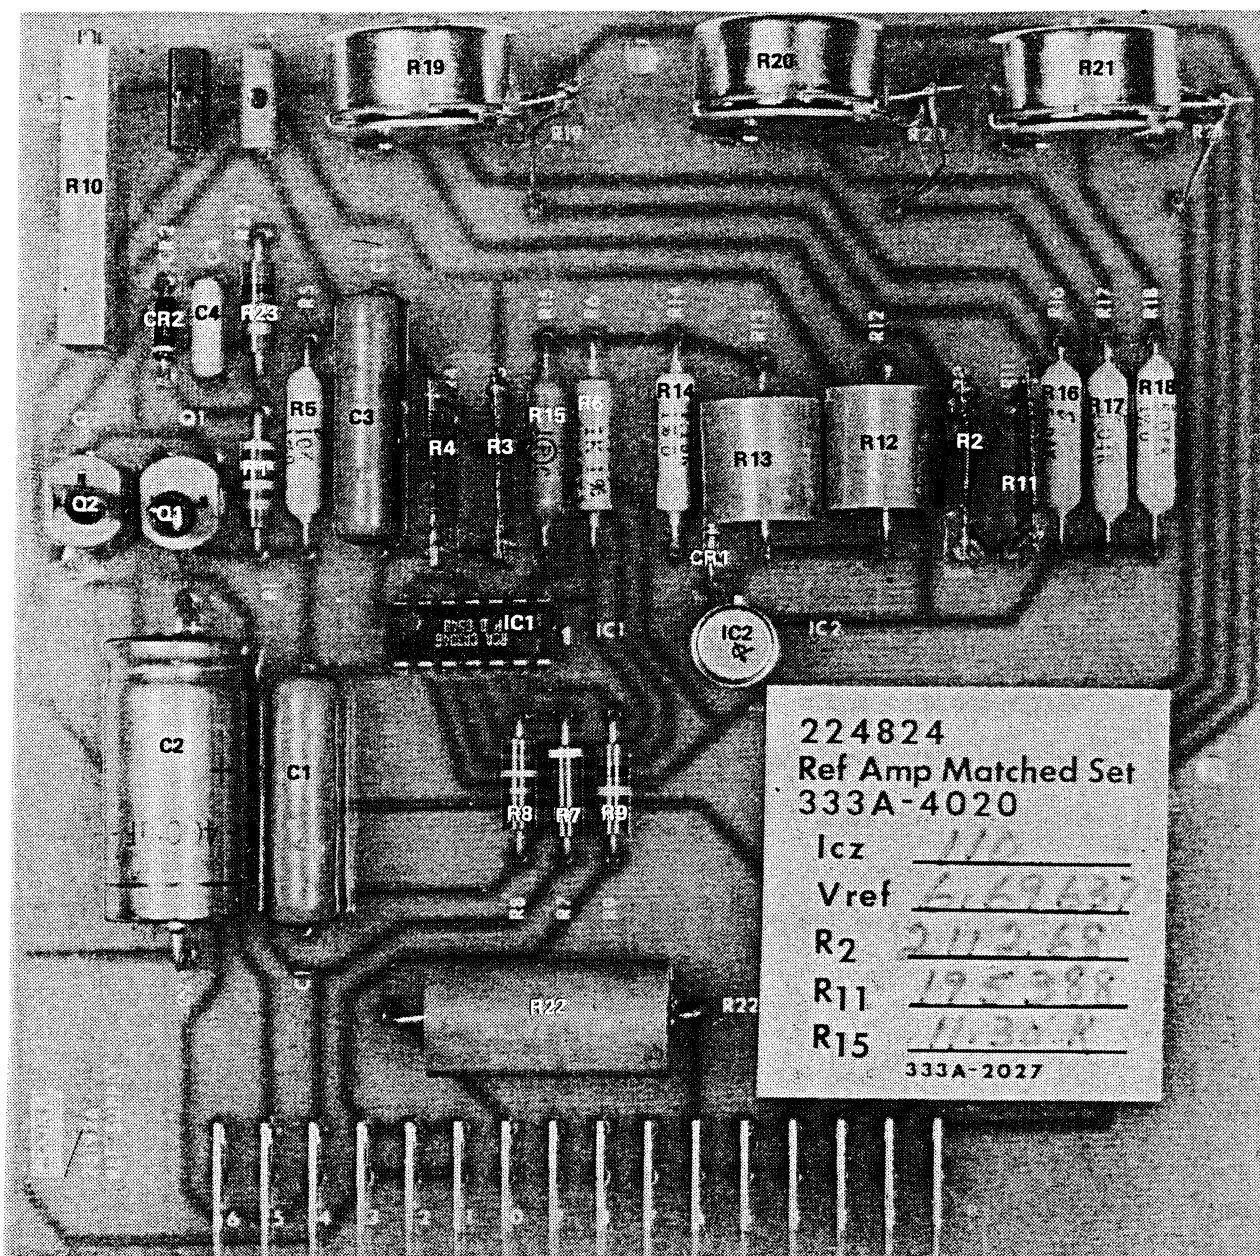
+10 VOLT REFERENCE SUPPLY ASSEMBLY
